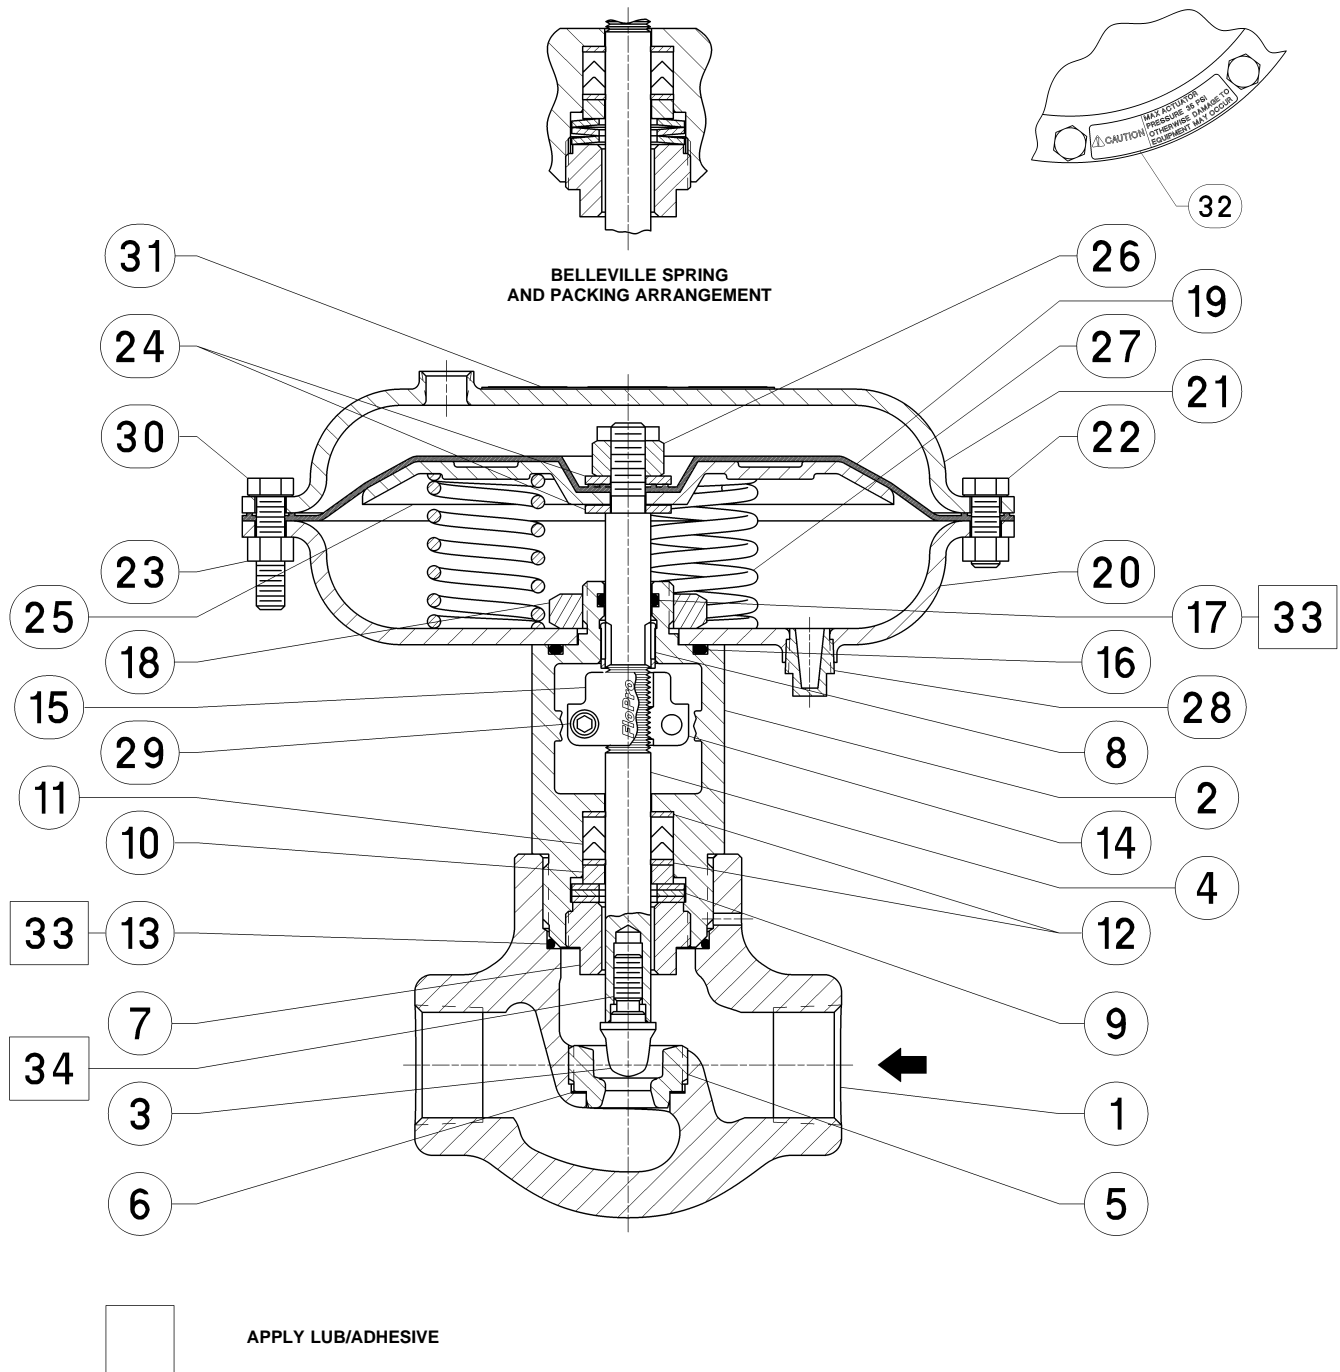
Type D2 FloPro Assembly—Spring-to-Open
